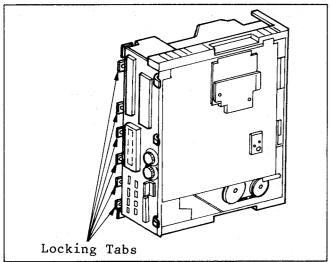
Opening of Bottom & Front P.C. Boards-(2)
